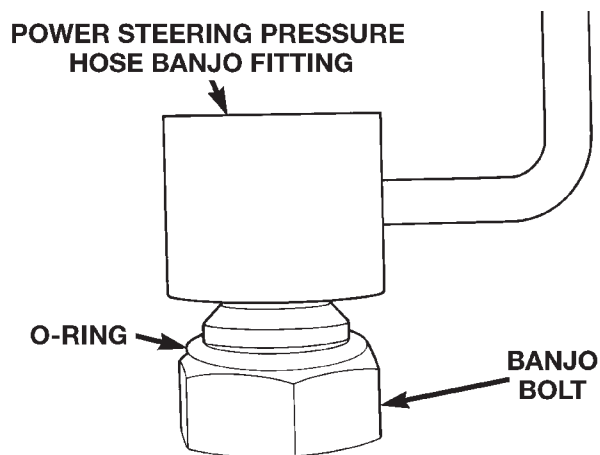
O-Ring Installed On Banjo Fitting Bolt
